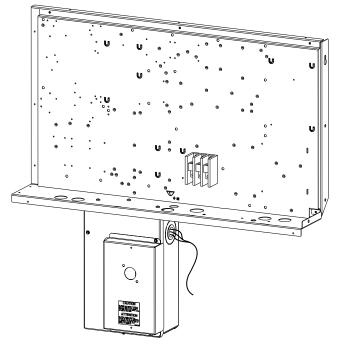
Location of HACR Circuit Breaker Enclosure
